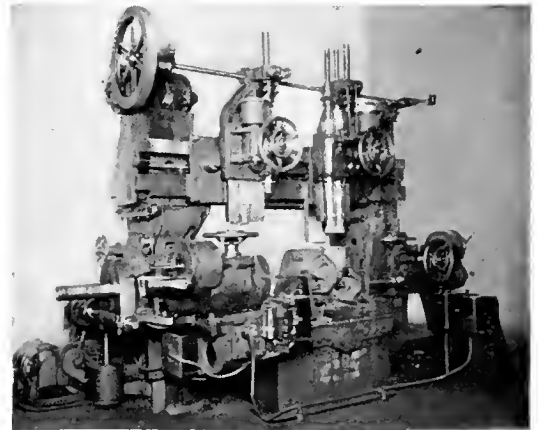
A Special Five-Spindle Boring Mill. Three-motor drive
